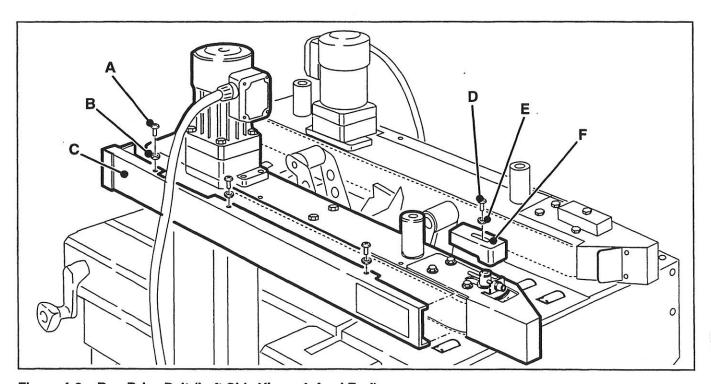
Box Drive Belt (Left Side View - Infeed End)
